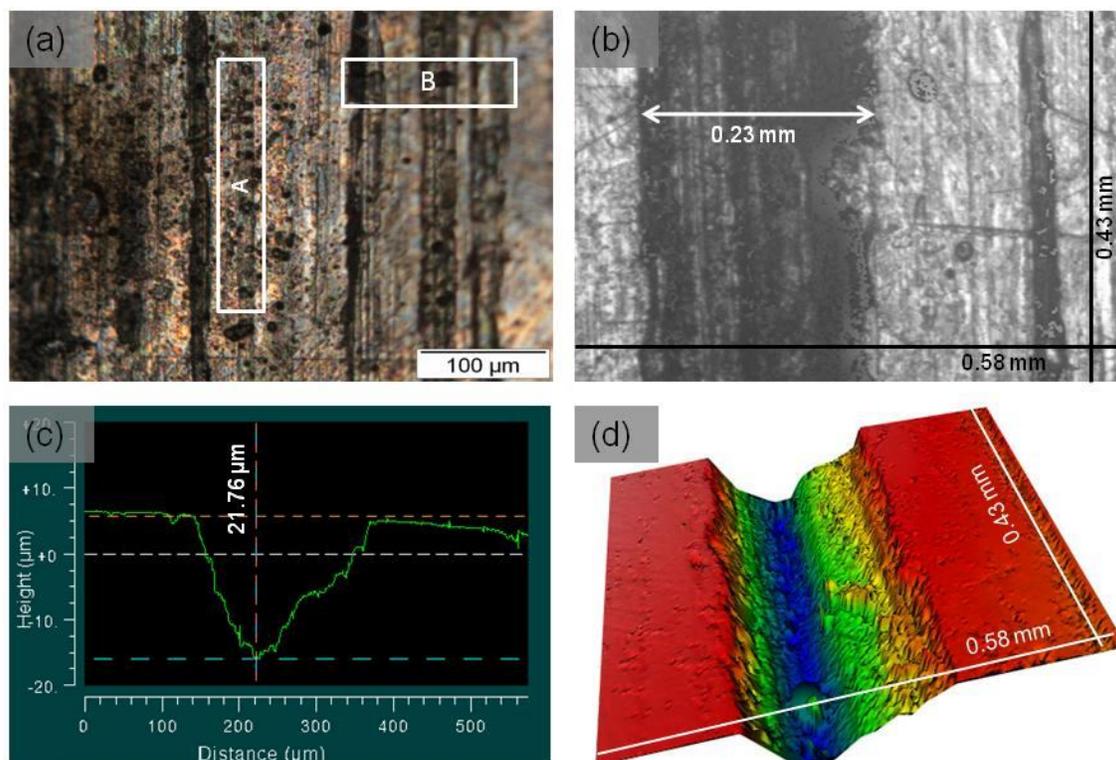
Tiger 1 Replacement cylinder-liner (a) Surface topography (A) illustrates debris formation (B) shows formation of grooves (b) Groove width (0.23 mm) (c) Groove Depth (21.76 μm) (d) 3D view of the same groove
